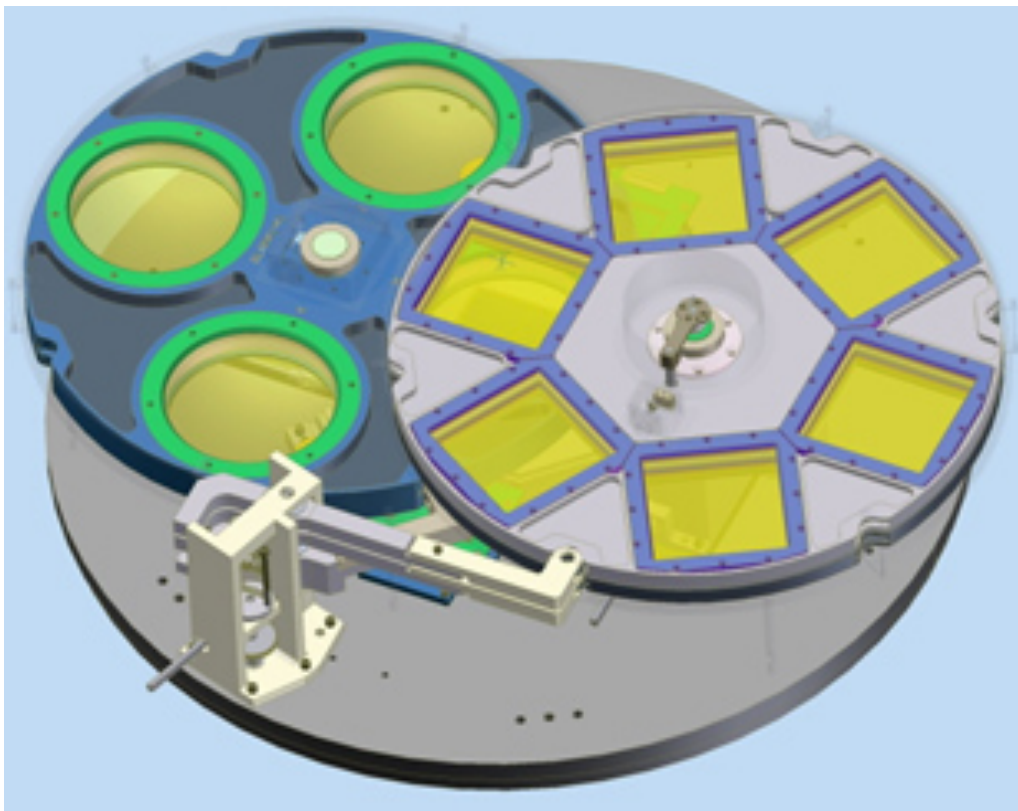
The Filter wheels and field flattener wheel with the detent arm assembly.
